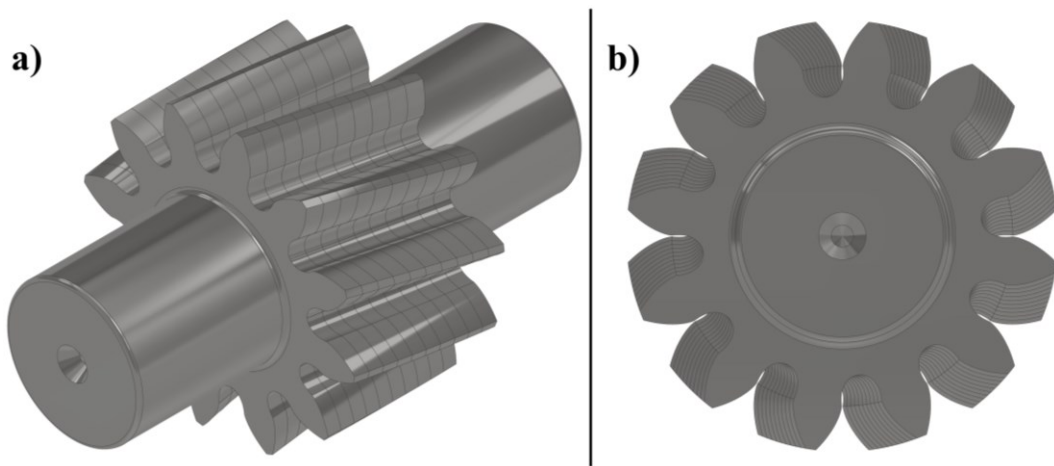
Surface Tool for helical gear slicing procedure: a) 3D view; b) lateral view.
